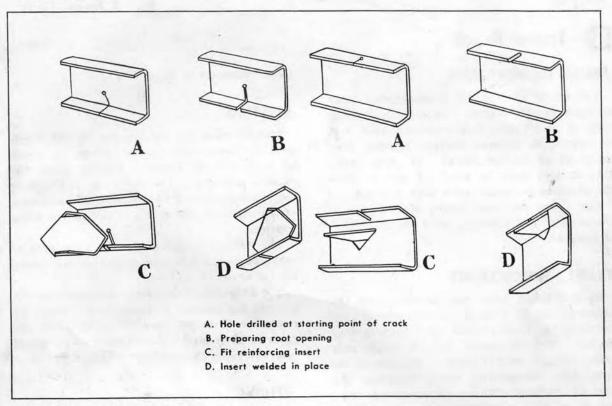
Method of Preparing Crack in Frame for Welding
